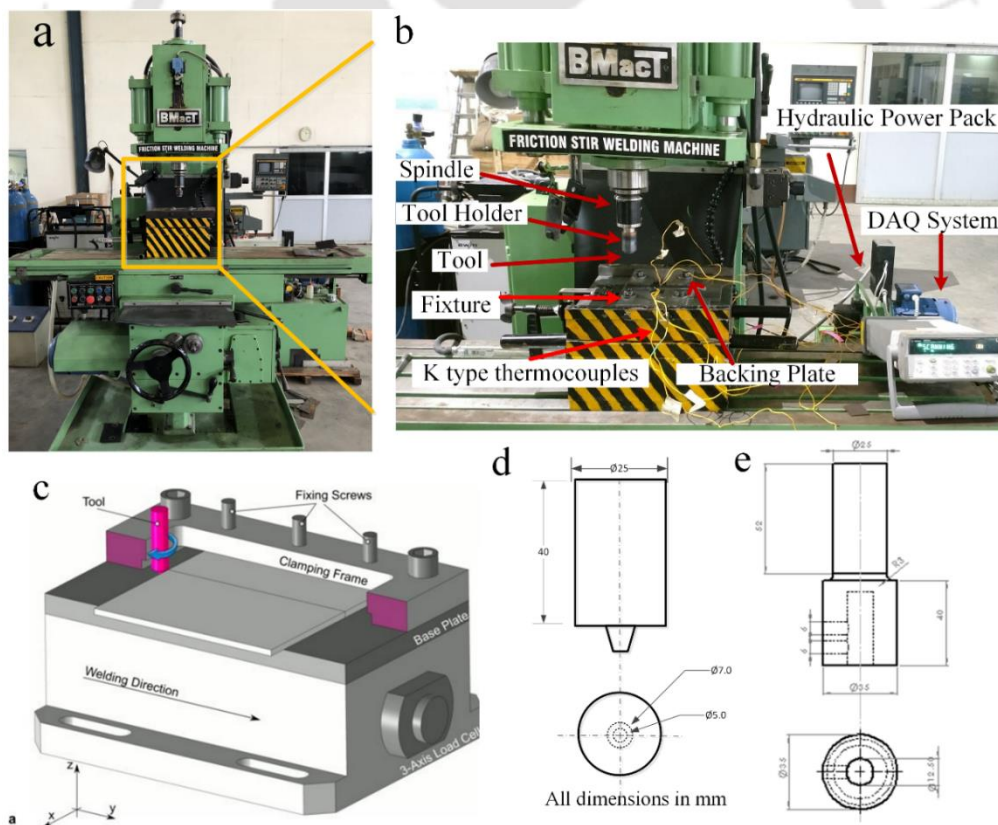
(a) Illustration of FSW machine, (b) experimental setup used in the present study, (c) fixture developed to perform experiments, (d) tool dimensions, and (e) tool holder dimensions
